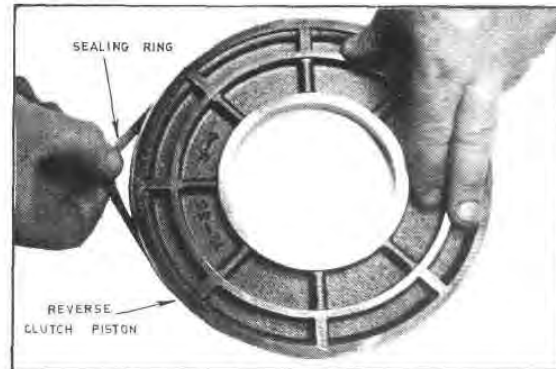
Assembling the Reverse Clutch Piston Sealing Ring
